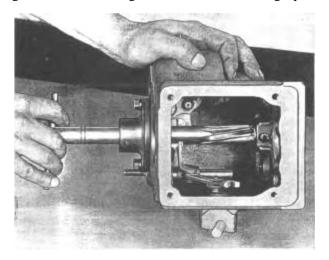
Reaming Countershaft Bushings-3-466 Countershaft Bushing Line Reamer
